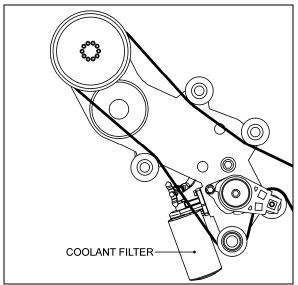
COOLANT FILTER (DDC S60 ENGINE) 05138
